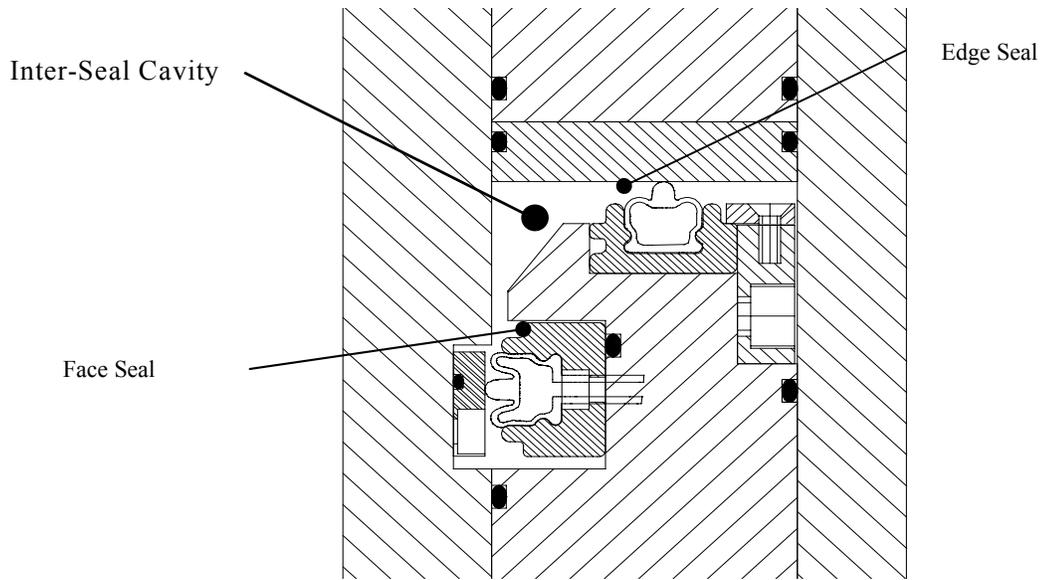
Test Rig Cross-Section Showing Sealing Configurations and Testing Arrangement
